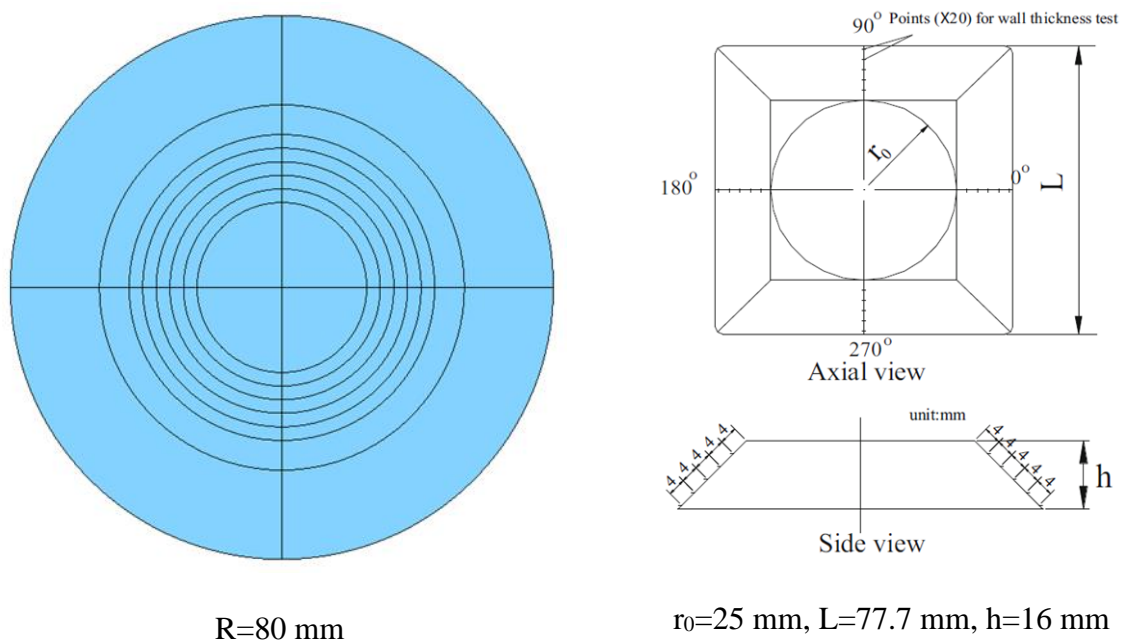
Model geometry and dimensions of the aluminum plate before and after forming
